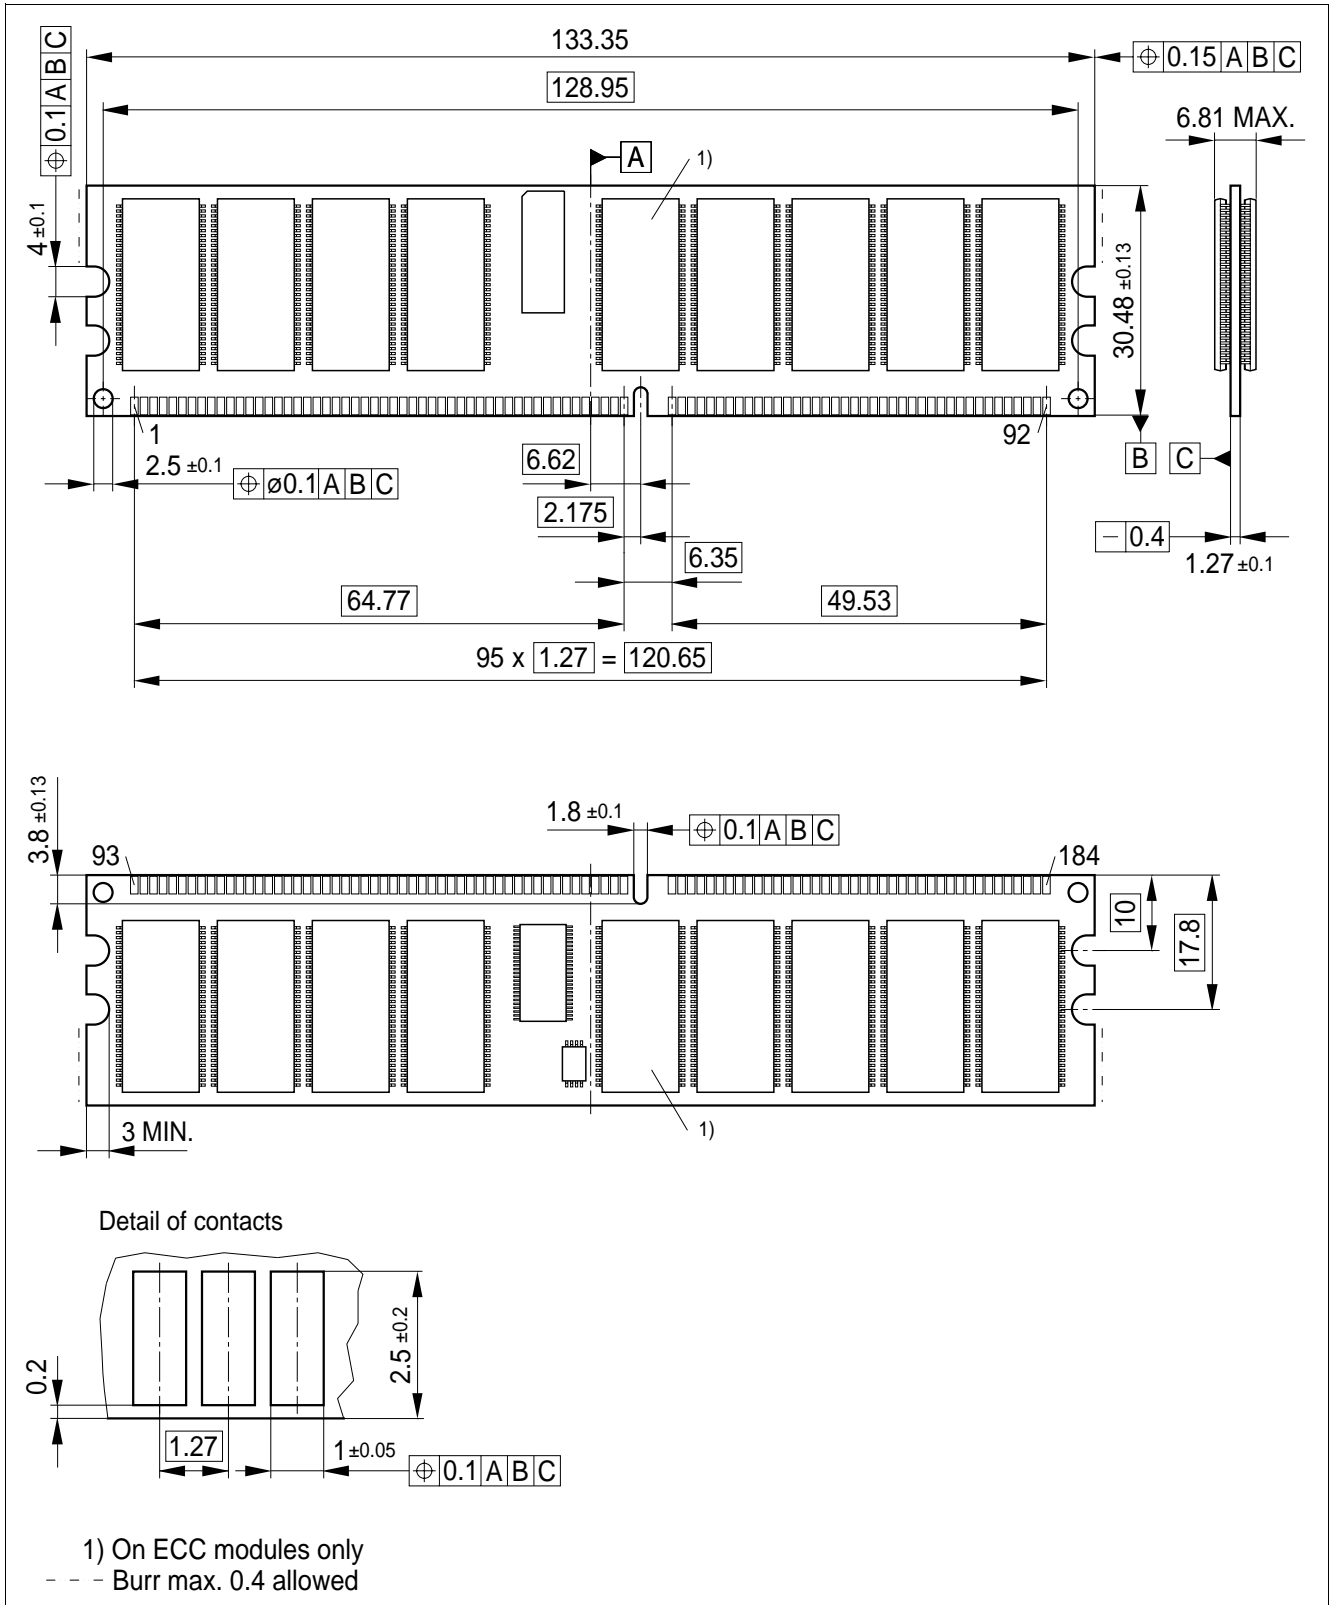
Package Outlines Raw Card N (L-DIM-184-14)
